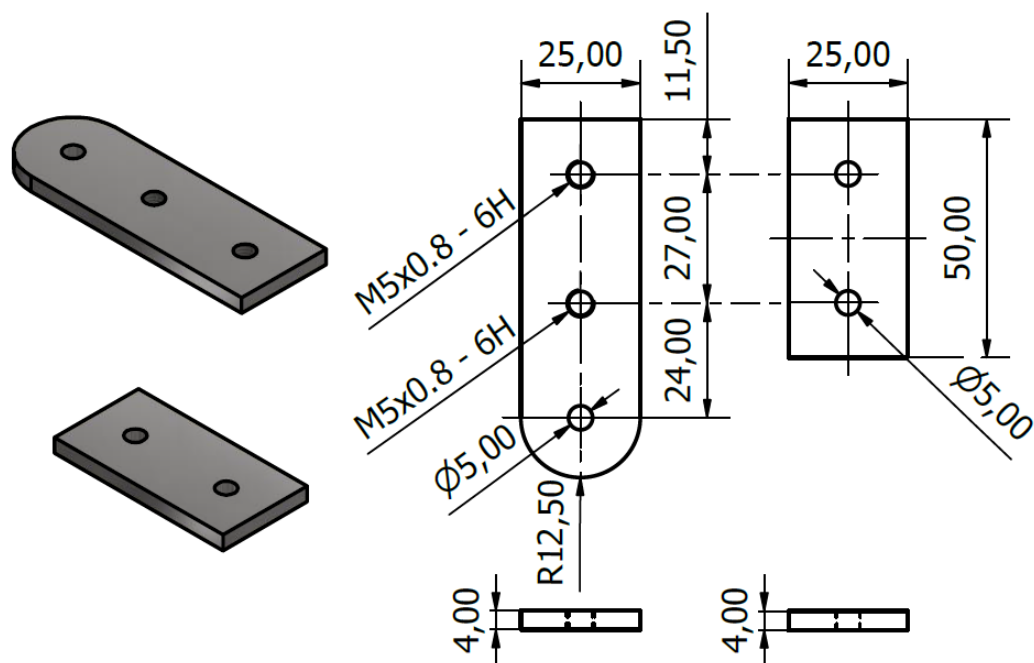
Pressing holders diagram in millimeters of the Fixing Structure.
